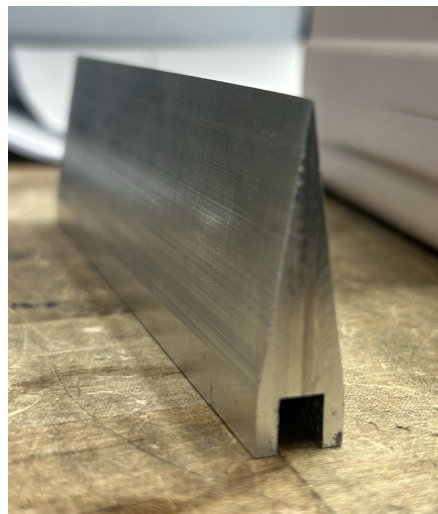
Finished aluminum trailing edge component after machining and slot cutting.
